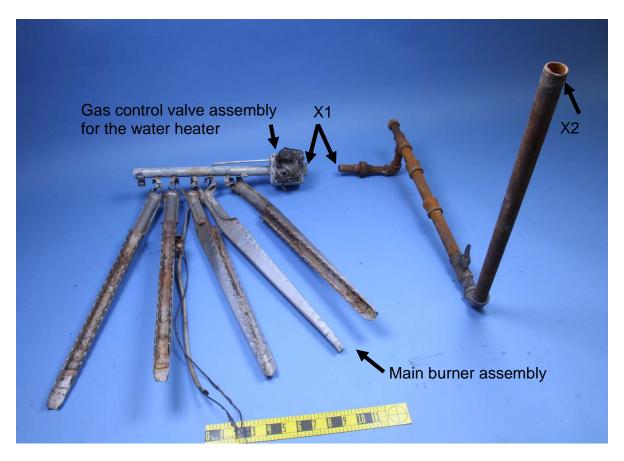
As-received main burner assembly and pipe segment that separated from the gas control valve assembly, in the area indicated by arrows "X1". This photograph shows the location of the mating fracture faces and does not show the alignment of pieces relative to each other prior to the accident.
